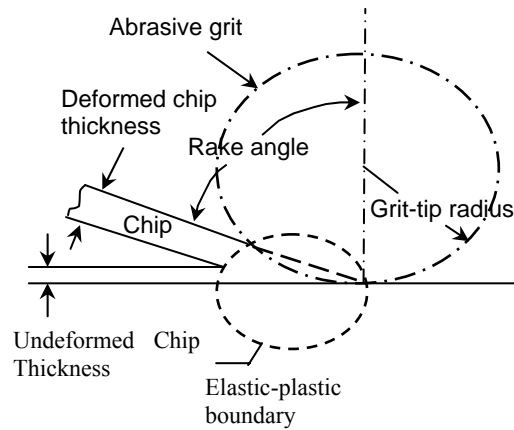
Mechanism of material removal involving extrusion of heavily deformed material ahead of a large radius tool in grinding of ductile metals.
